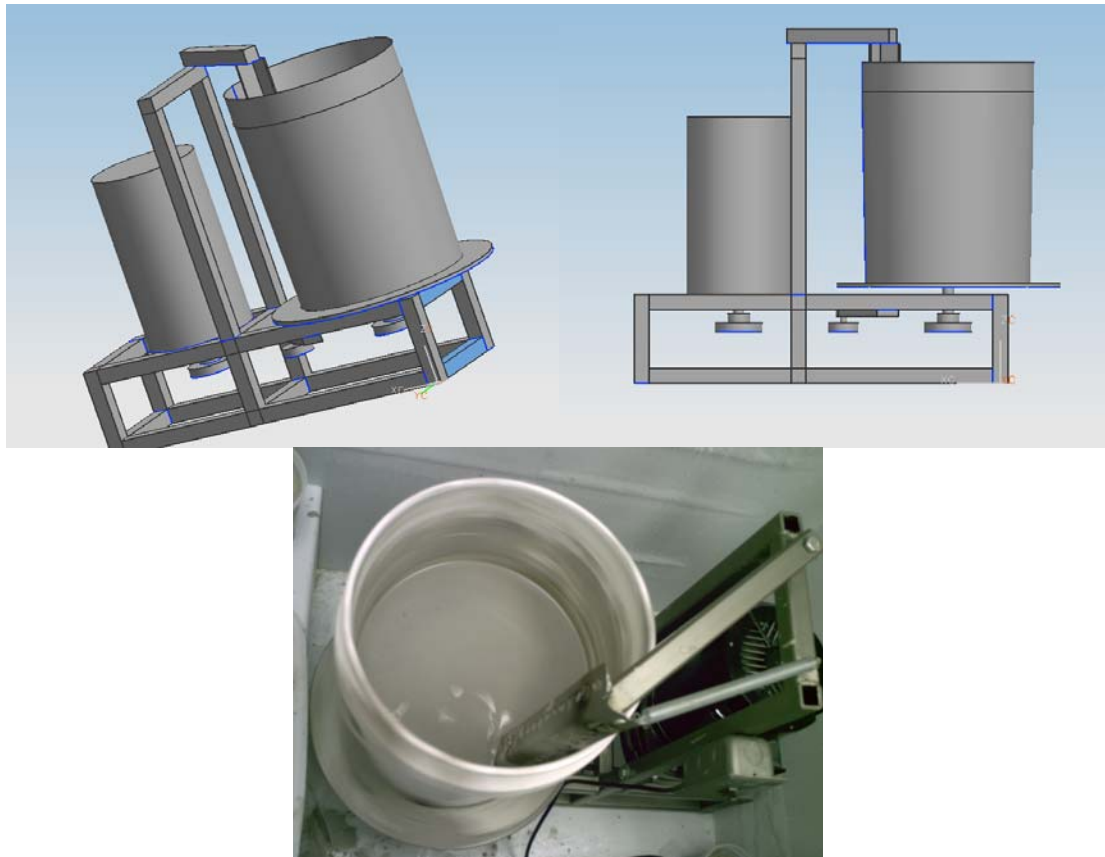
Schematic of slurry tank system. It is driven by an electric motor with built-in reducing gears (16rpm) rotating a five gallon bucket using a  $\frac{1}{2}$  inch drive belt.
